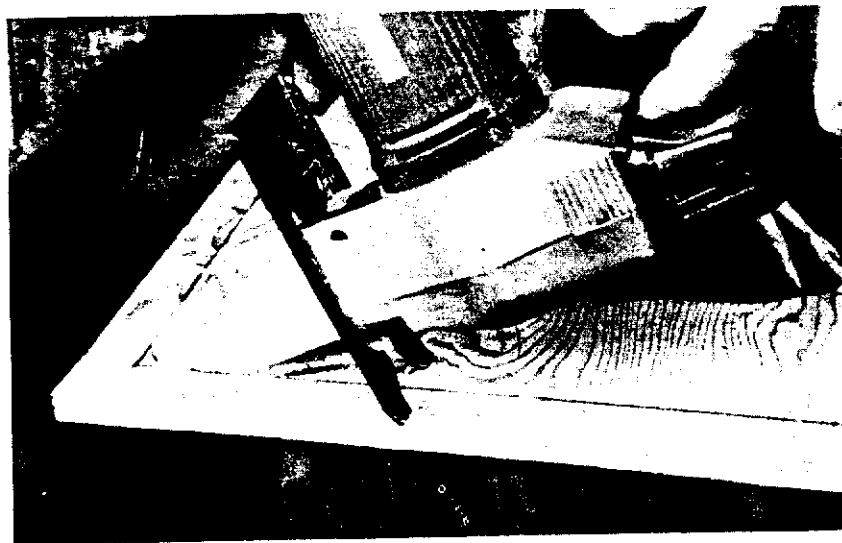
Plunge-cut the door panel by starting the saber saw on an angle. Lower the blade slowly and accurately into the cut line.
